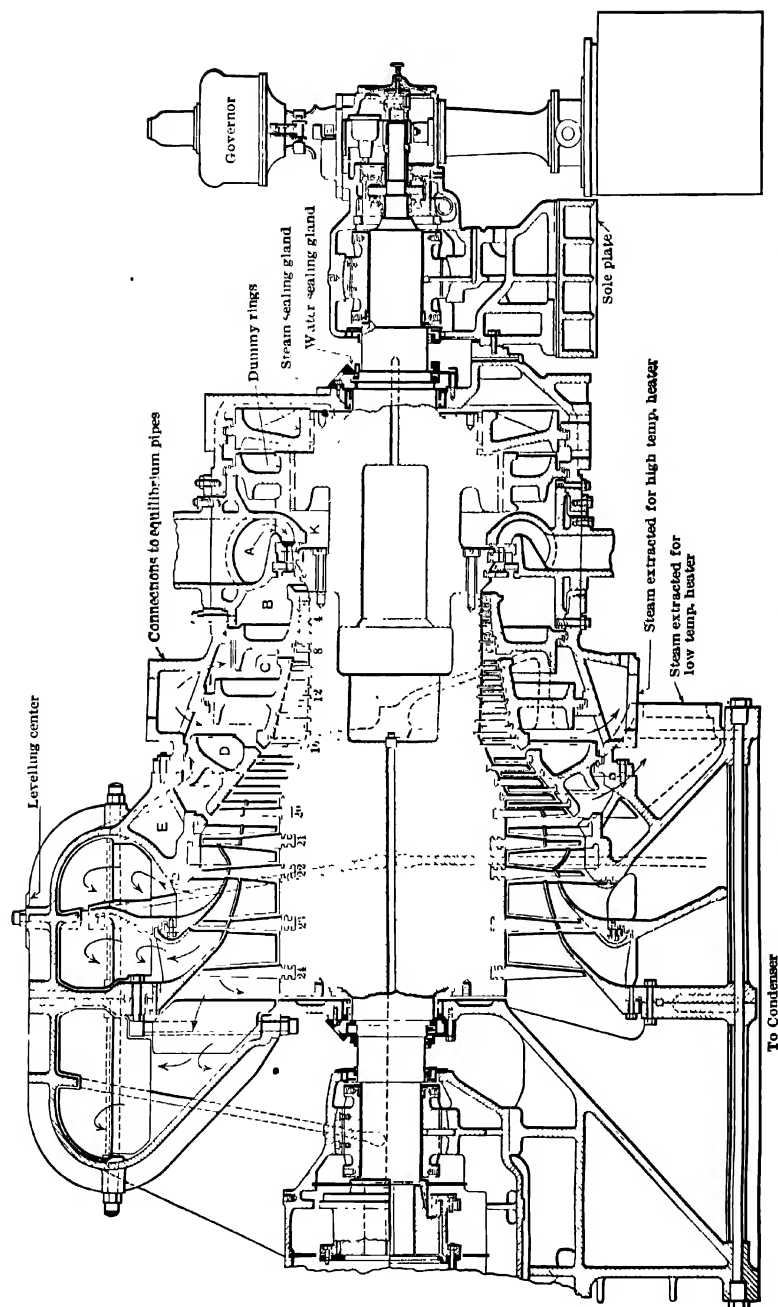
Assembly of 35,000-kw. Westinghouse High-pressure Single-cylinder Condensing Turbine.
